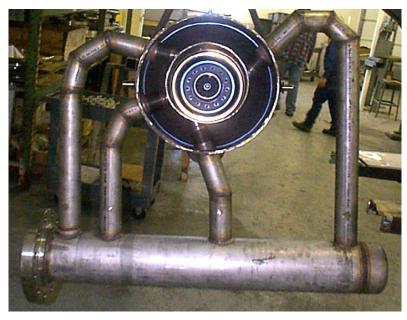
"Hot" end of the connection flow paths between the injector ports and the heat inlet duct manifold for the C-30 Capstone Micro-Turbine assembly.
